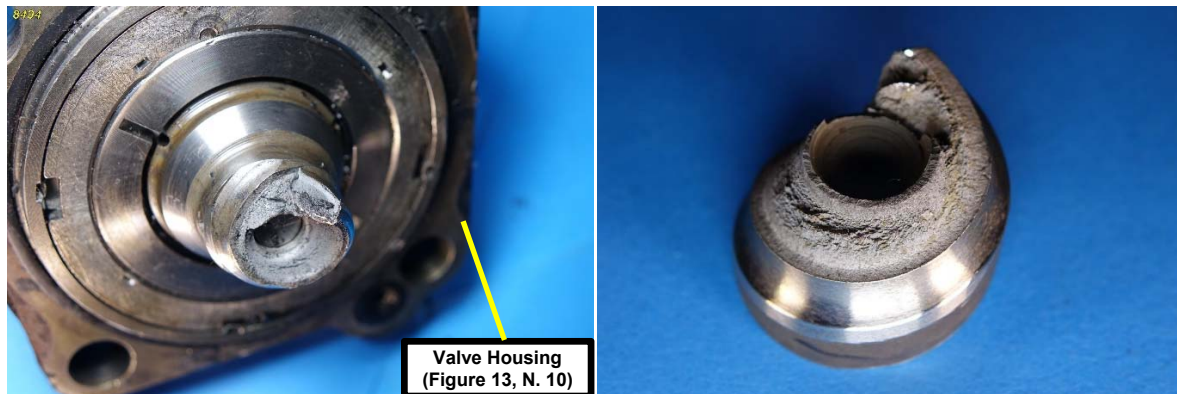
Worm screw fracture surfaces (cut segment on right).
